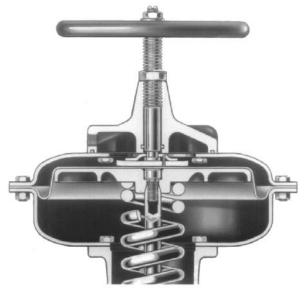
Top-mounted handwheel mounted on a direct-acting diaphragm actuator. (*Courtesy of Fisher Controls International, Inc.*)
